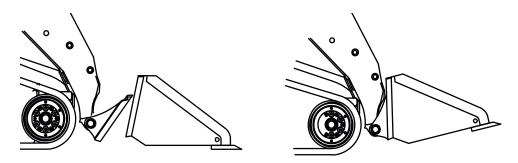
A QUICK ATTACH MECHANISM LOCKED TO ATTACHMENT
